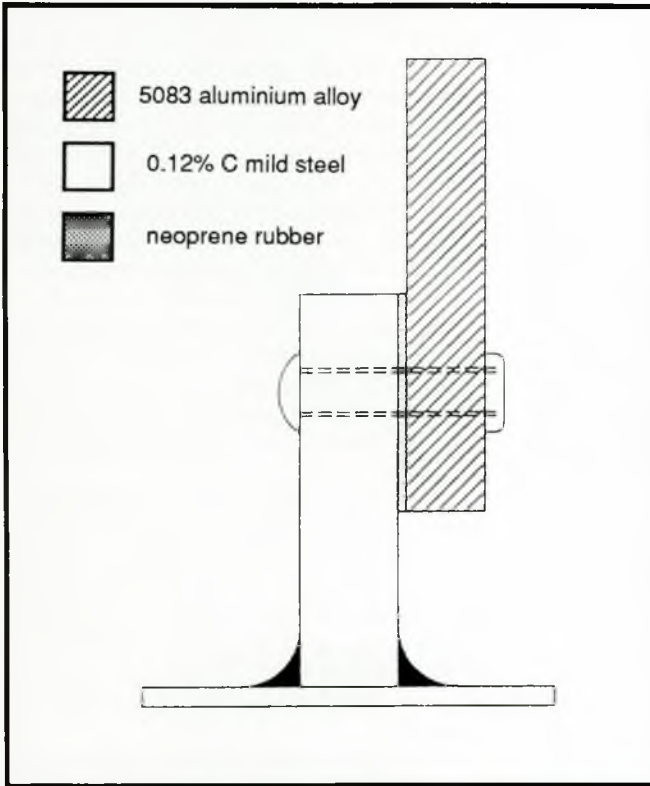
Geometrical arrangement of a conventional rivetted joint
